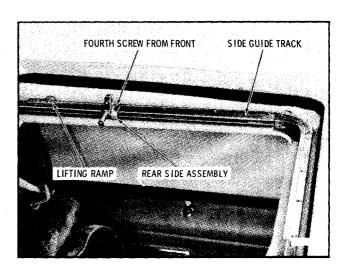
Rear Slide in Centered Position - E and K Styles
